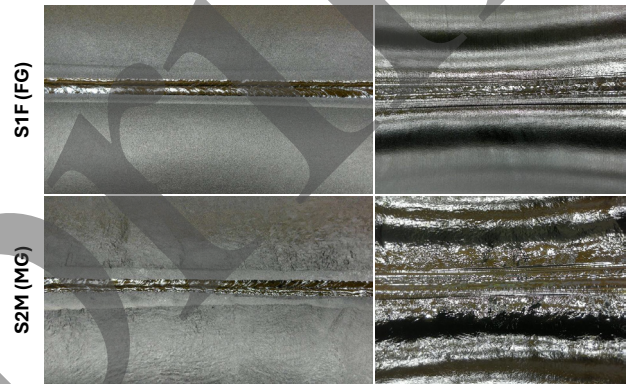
inner surface inspection of the FG and MG single-cell cavities, after EBW (left), and after Bulk EP and annealing (right).
